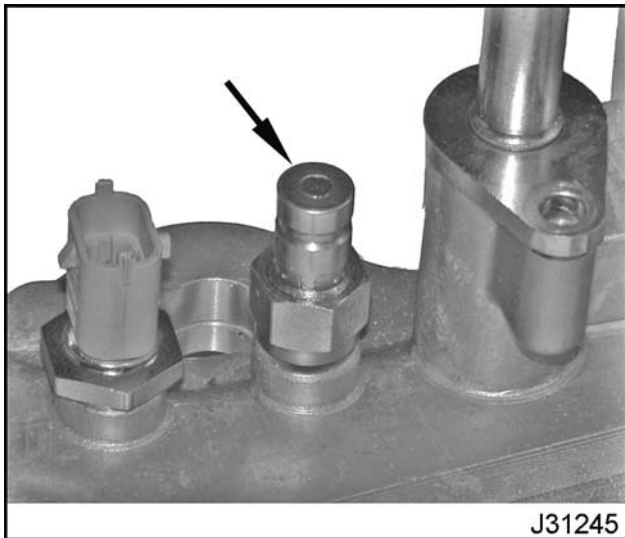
Fuel Pressure Test Fitting installed in EOP switch port
